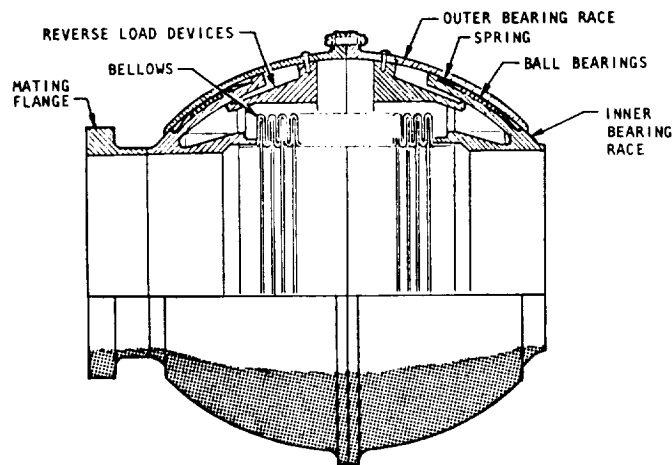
Ball-bearing ball-joint restraint used on F-1 engine oxidizer pump for engine test.
